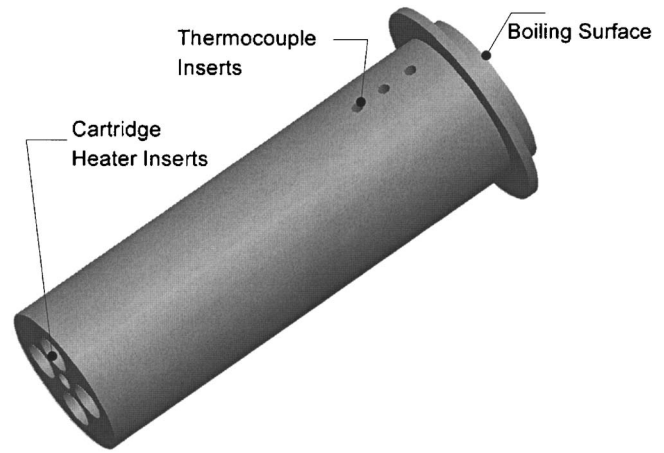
Cylindrical heater and heat transfer surface used in pool boiling experiments
